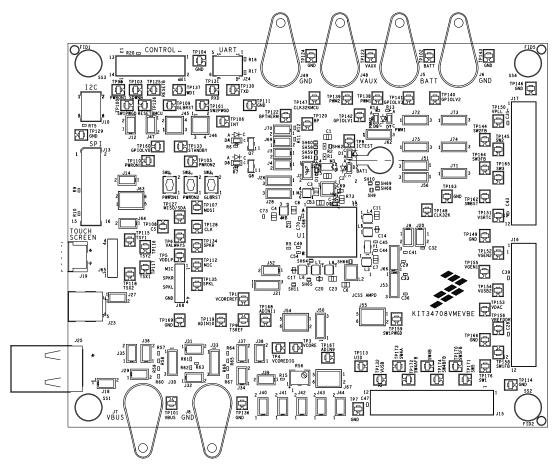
KIT34708VMEVBE (Rev. B) Assembly and Silkscreen Top Layer
